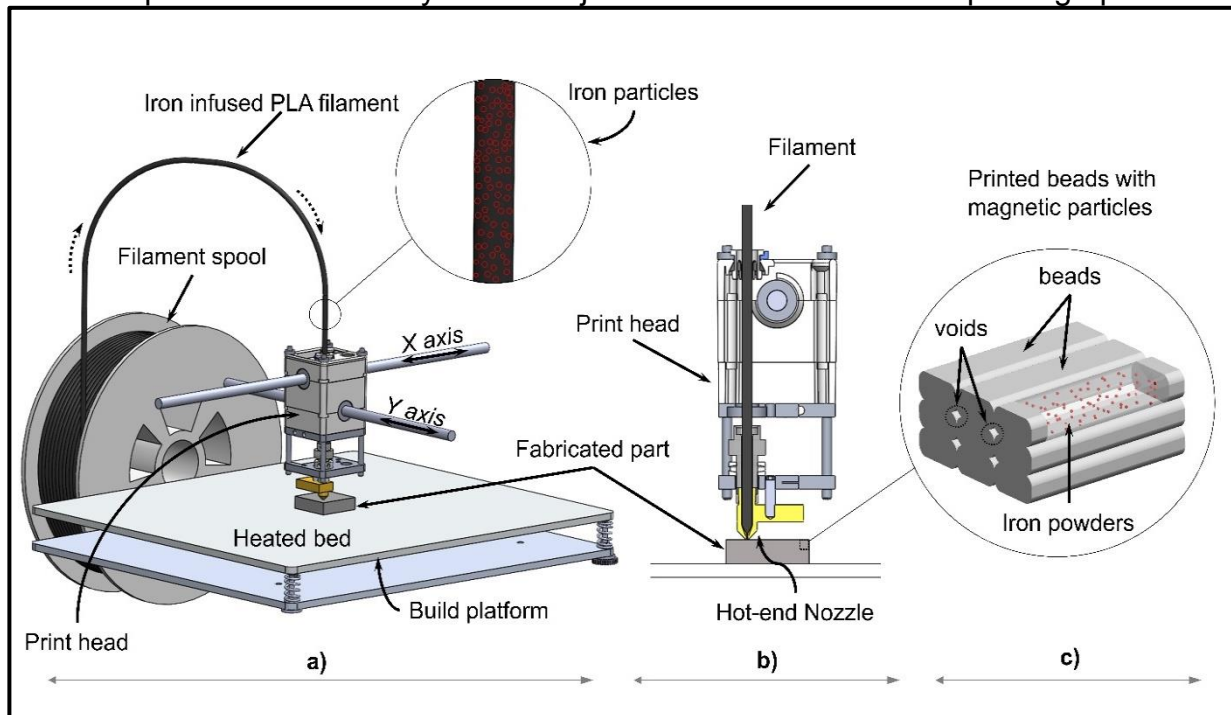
Production of magnetic part using the FFF process. (a) Isometric view of the process, (b) Front sectional view of print head showing the filament deposition process at the end of the hot-end nozzle, (c) Deposited beads.
